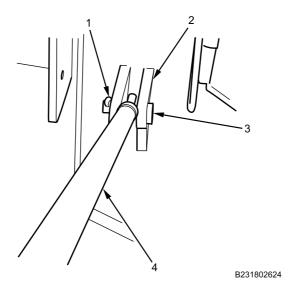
Rear Door/Ramp Lower Gas Spring Bracket.
